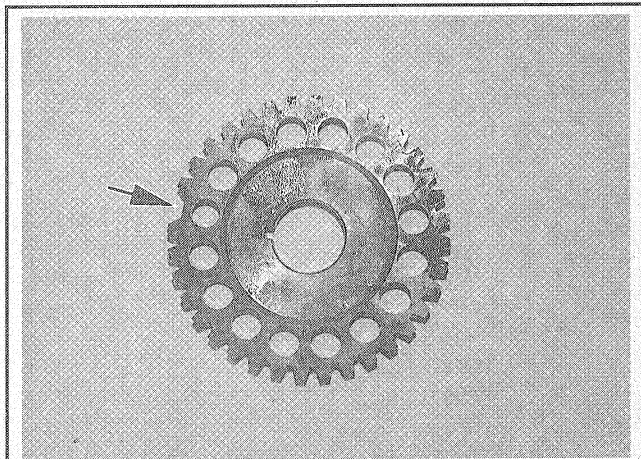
The CKP sensor trigger wheel rides on the front of the crankshaft. The missing tooth creates a fluctuation of voltage in the sensor
